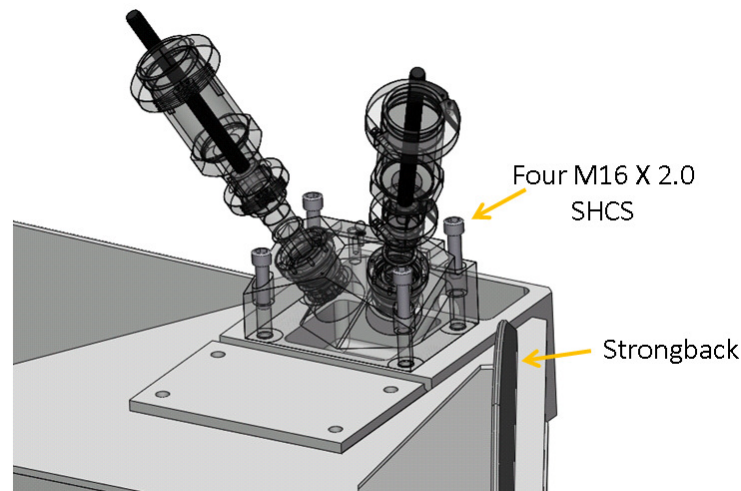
The installation of a lower bi-pod assembly onto the strongback at elevation is shown [24].
